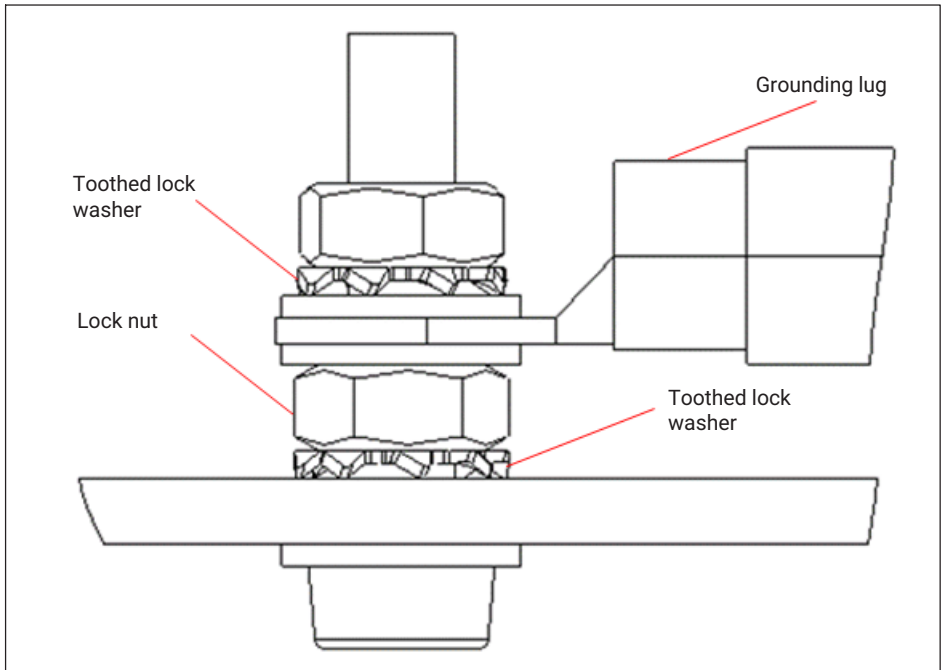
Housing bolted connections with grounding cable lug and additional nut and toothed lock washer
